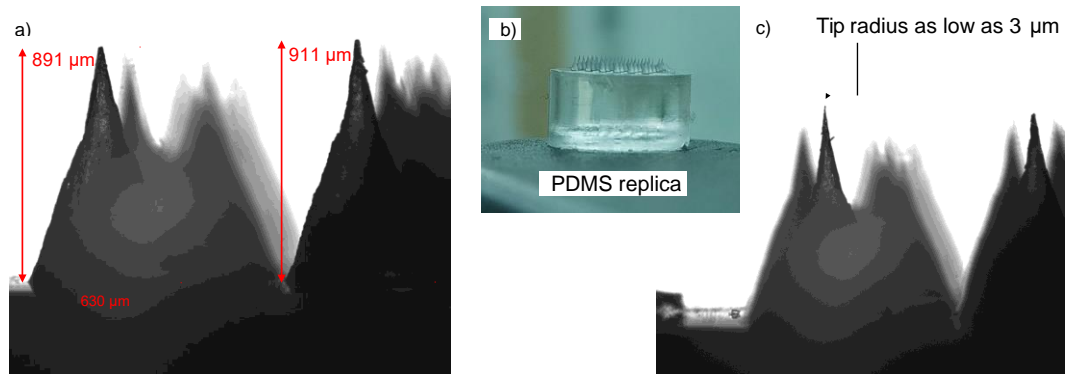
a) Telecentric optical image of some of the microneedles from 6x6 laser-machined mould insert, b) PDMS replica of the mould insert, c) Image showing some of the lowest tip radii achieved by the laser machining technique.
